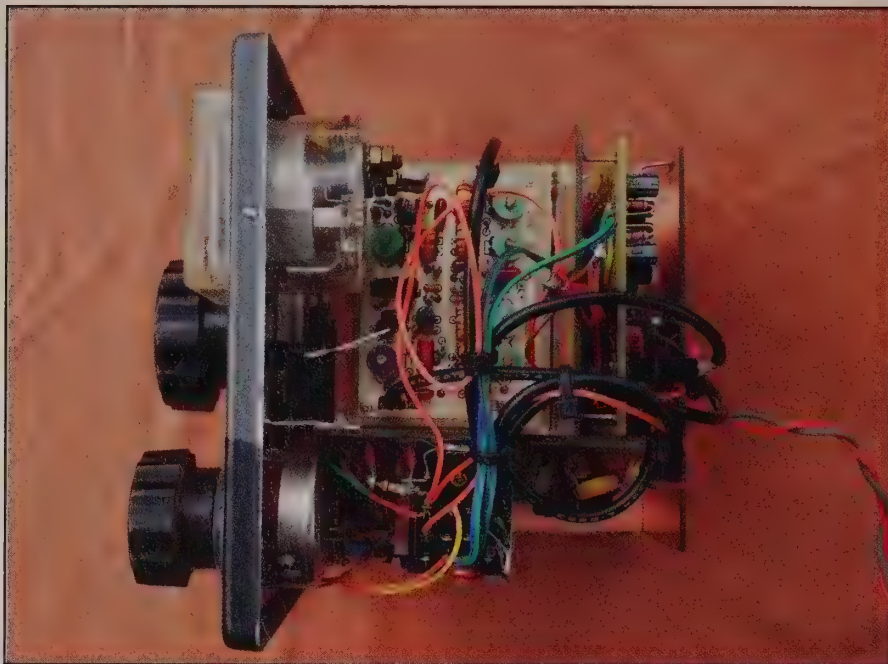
A look inside the 6-meter SSB transceiver. The internal chassis is made from soldered up PC board pieces.
